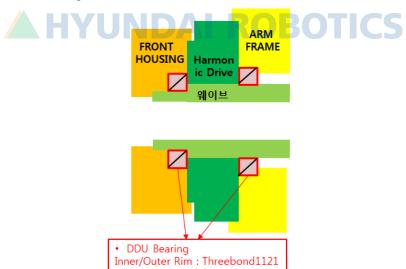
R2-axis reduction gear Three Bond coating detail [HH007C]
